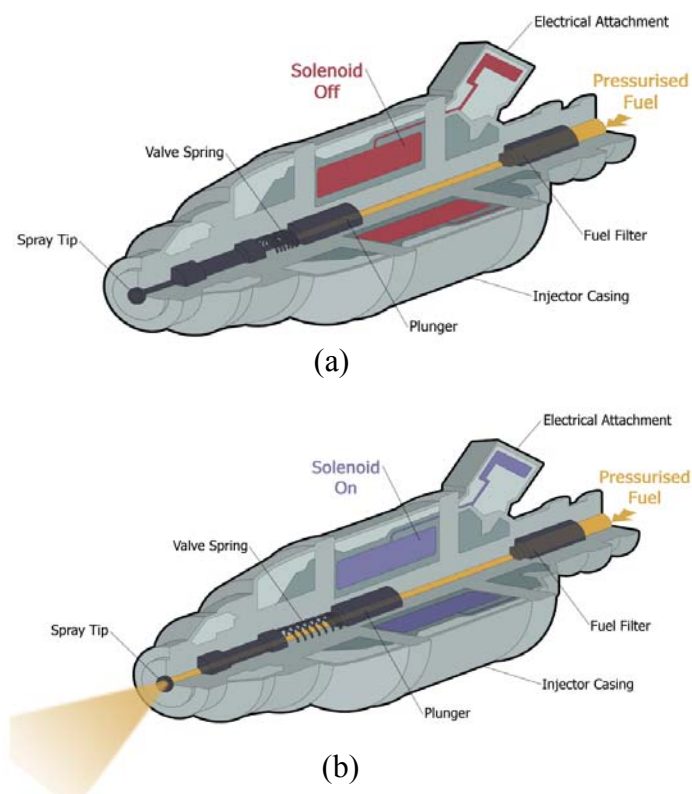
Traditional fuel injector; (a) solenoid off, valve closed position; (b) solenoid on, plunger movement and valve open position [76].
